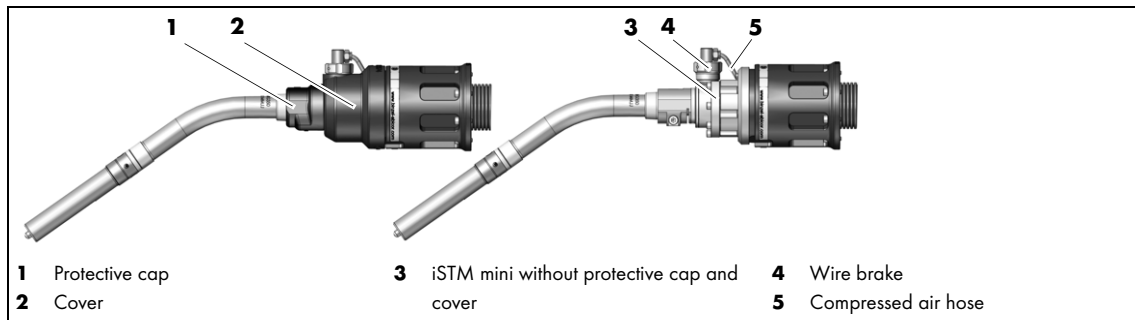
Cleaning the iSTM mini for ABIROB® G with wire brake
